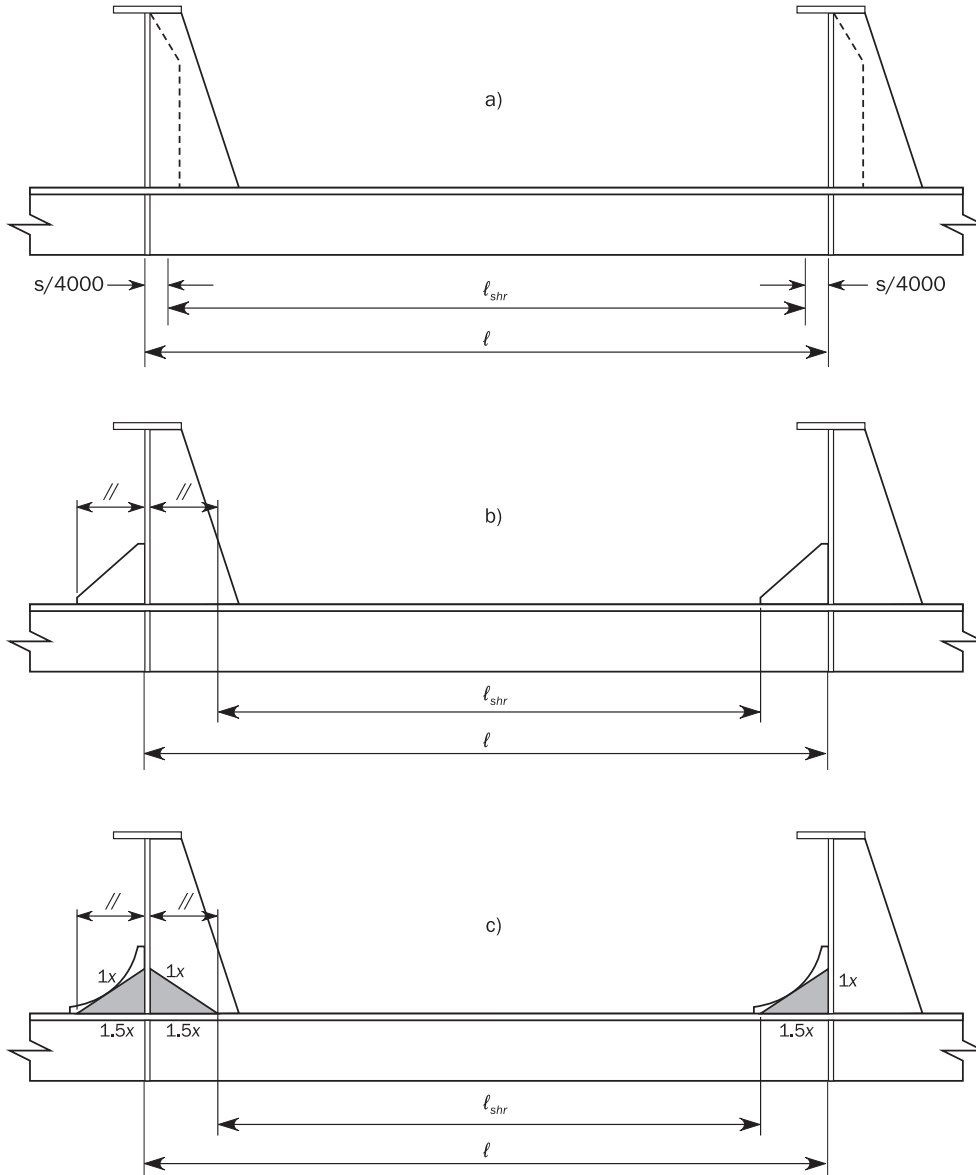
Effective shear span of stiffeners supported by web stiffeners (double skin construction)
